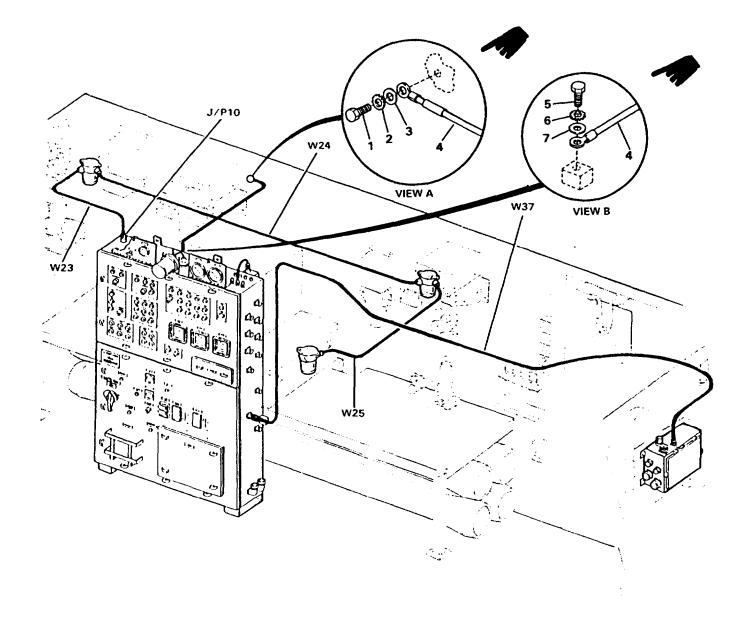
Electrical Installation (sheet 4 of 8) Primary Harness, Back Wall, W-33
